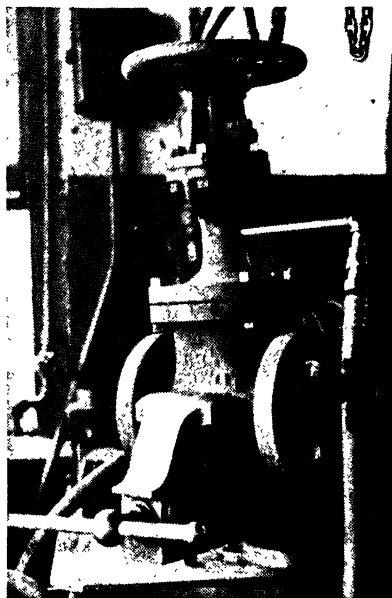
Admit compressed air to the bonnet to check seat leakage. (Courtesy of Standard Oil Co. of N. J.)
